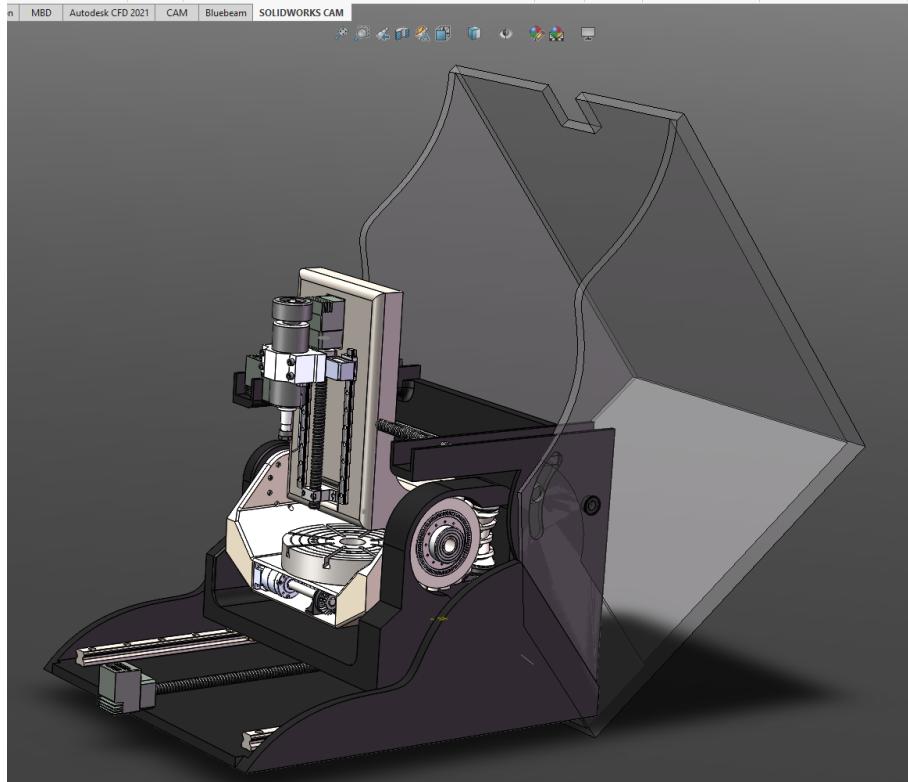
Overall Outer Assembly of the Design (with Case Opened)
